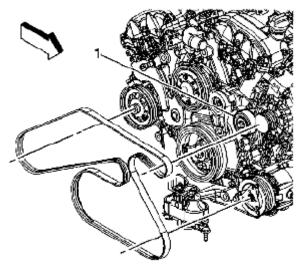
Identifying Drive Belt And Belt Idler Pulley Courtesy of SUZUKI OF AMERICA CORP.
